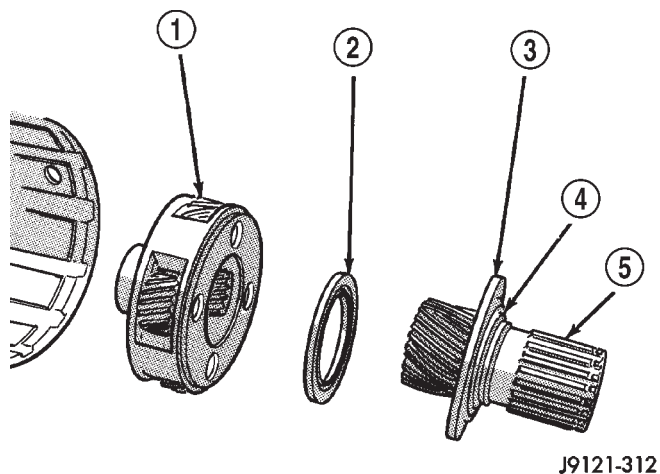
Removing Sun Gear, Thrust Bearing And Planetary Gear
